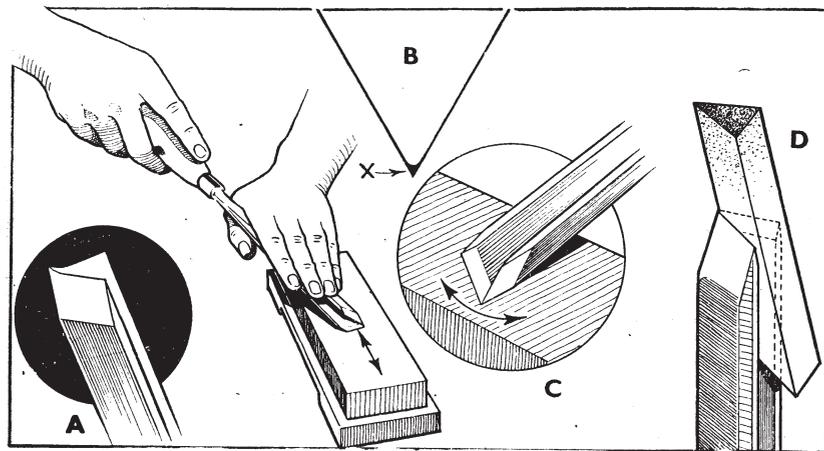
SHARPENING V TOOL ON OILSTONE, AND USING SLIP
